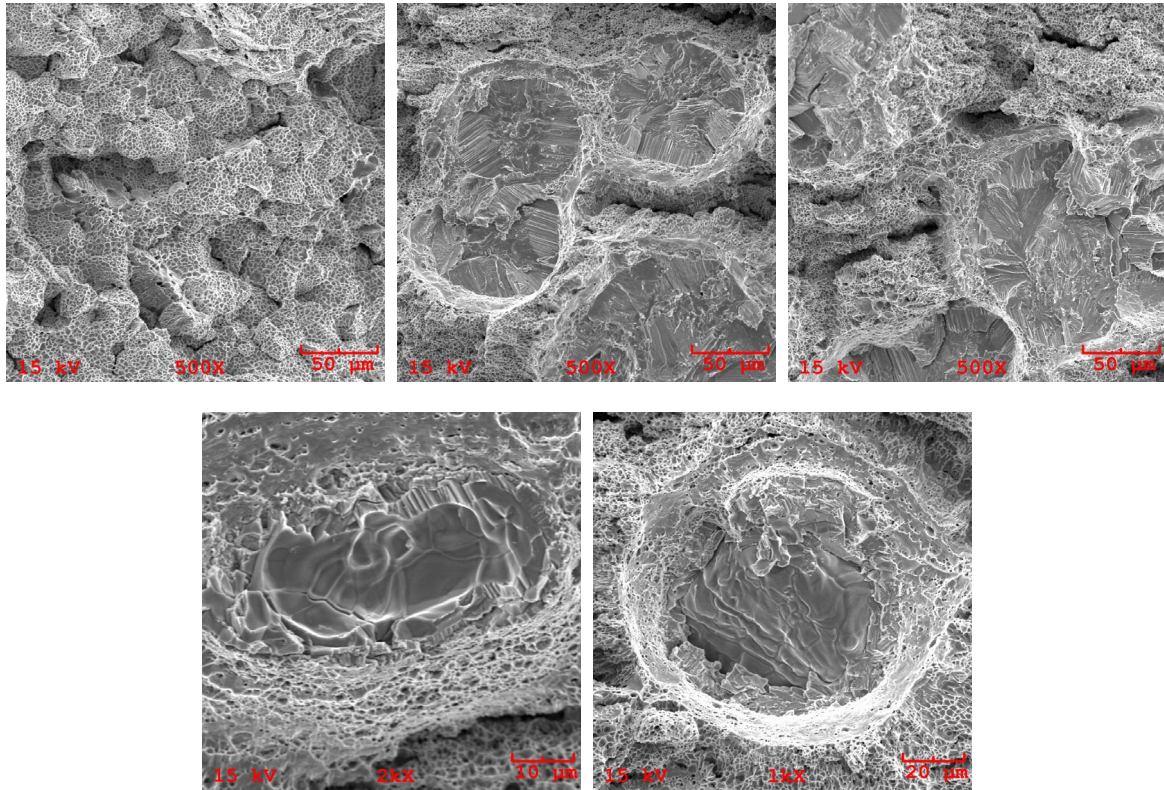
Fracture surfaces of specimens after three-point bending tests: (a) pure Cu; (b) Cu-3Ti; (c) Cu-5Ti; (d) Cu-2Ti (high magnification); (e) Cu-4Ti (high magnification).
